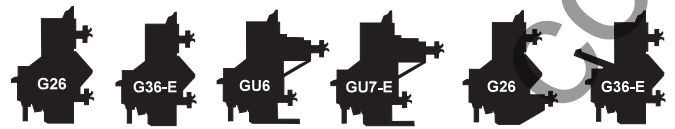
DTA Assembly Mounted to the Breaker – Manually Operated
